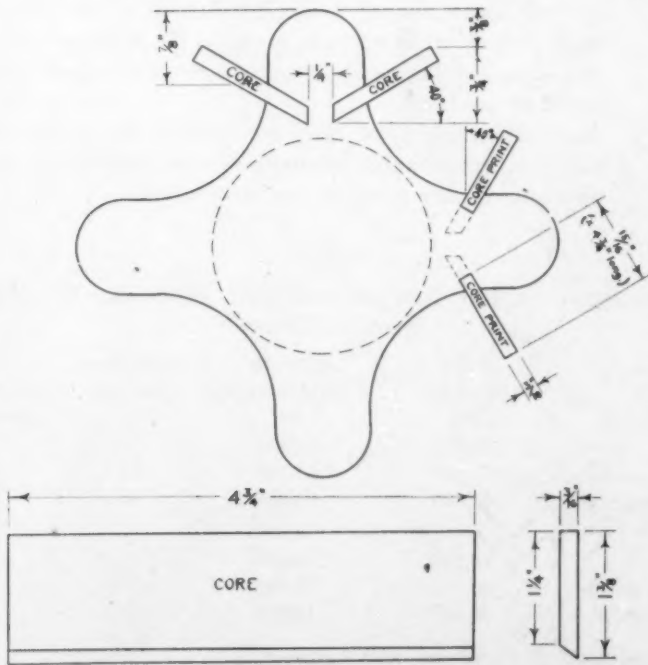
PATTERN NO. 7—PLAN VIEW OF MOLD (DRAG SECTION) WITH CORES INSERTED.
